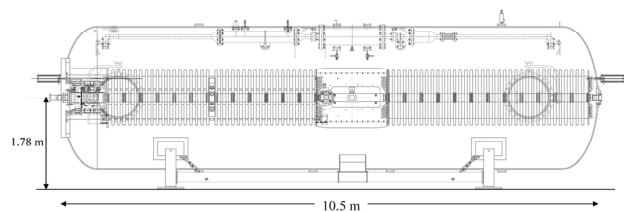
Cross-section Drawing of the Accelerator Tank (18SDH-2 Pelletron).
